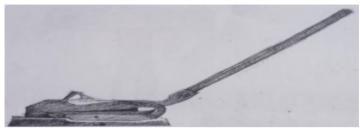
Cutter (Mkpachi): A Tool used to cut metal Drawn by Nzoiwu Azuka 2017
